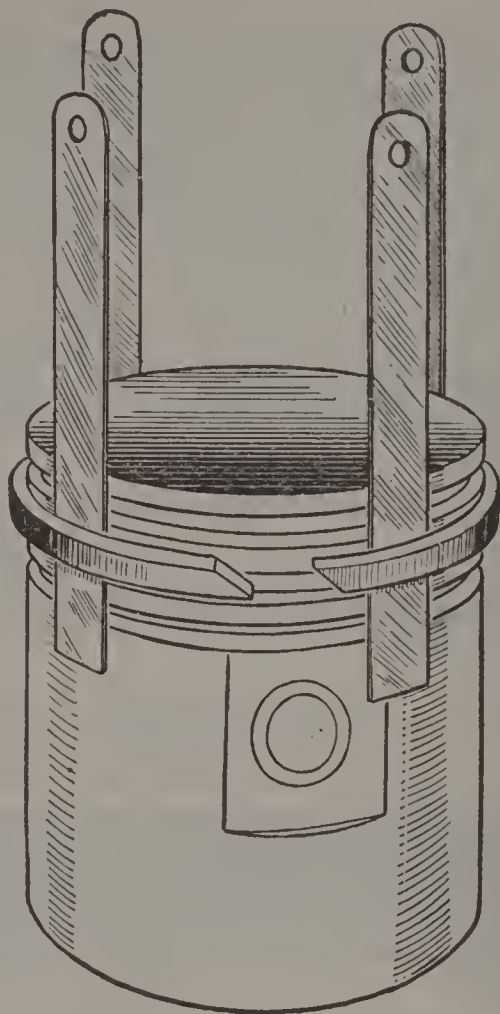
HACKSAW BLADES USED TO REMOVE PISTON RINGS
